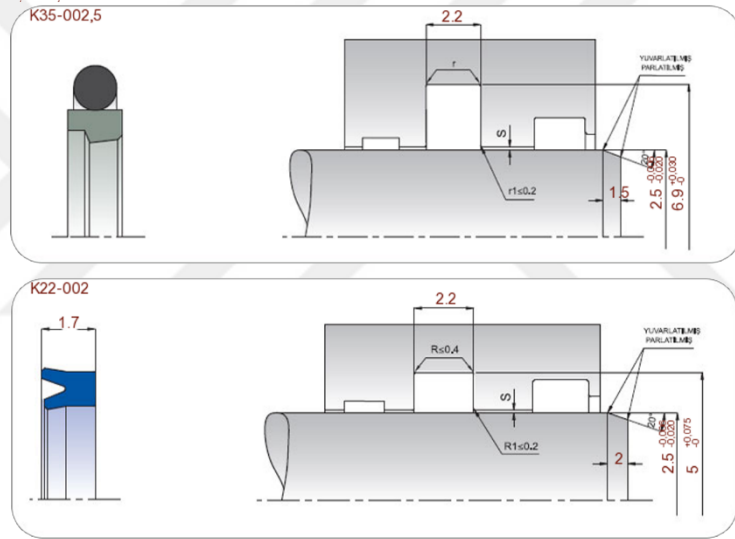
Technical drawings of seals and housings K35-0025 and K22-002 [43]
